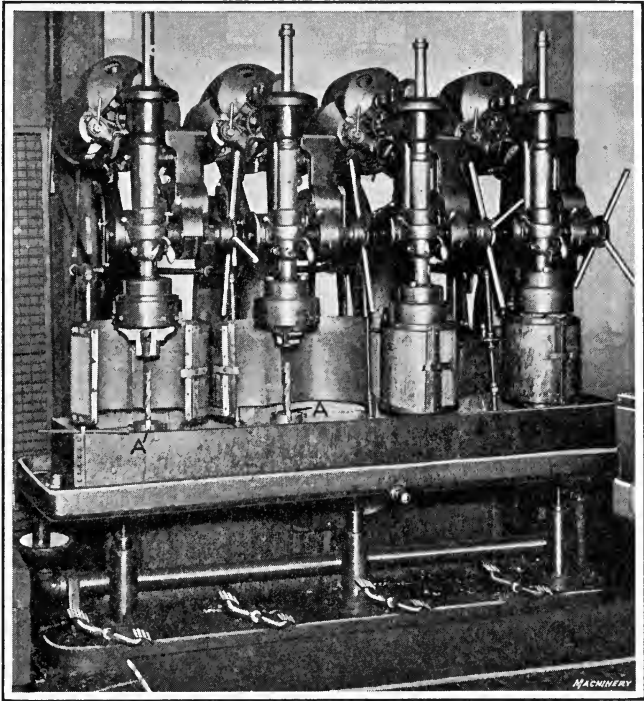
Gang Drilling Machine arranged for Drilling by Inverted Method
